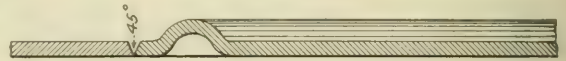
Partial View of Patch About to Be Welded to the Side Sheet.
